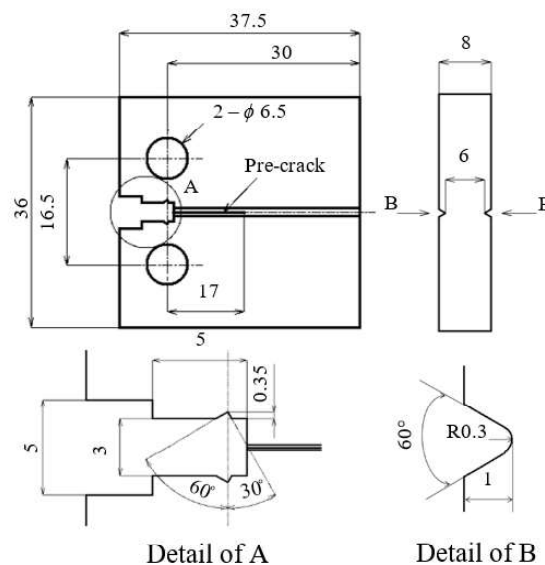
Shape and sizes of CT specimen (dimensions are in mm)
